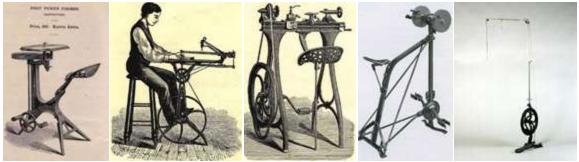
From Left to Right: Pedal Powered Former, Saw, Lathe, Grinder, and Dentist Drill [2]
